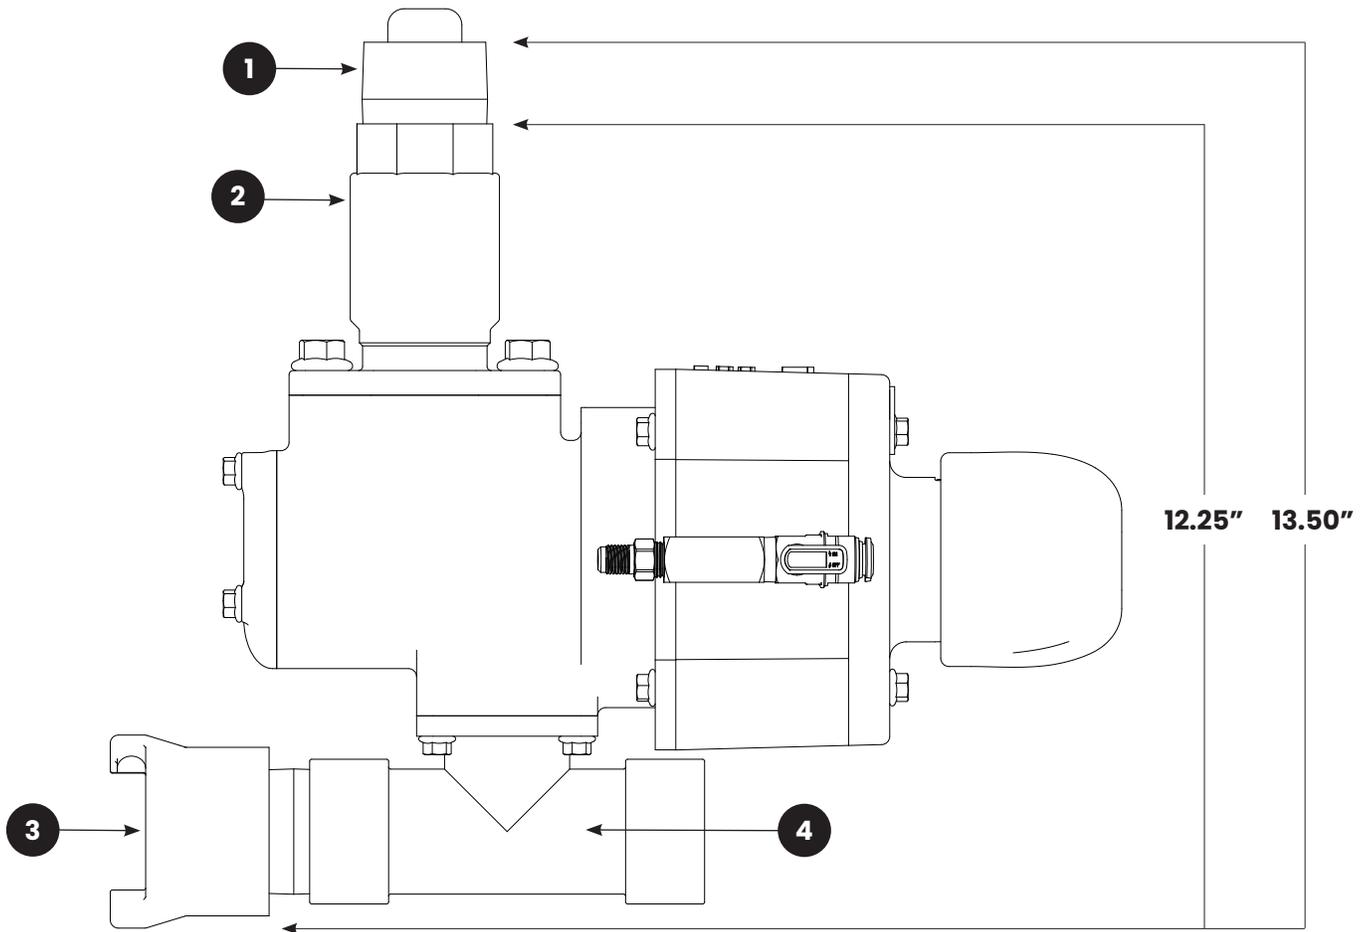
(1) 1.50" Installation Nipple; (2) Flanged Ball Valve; (3) Hose Coupling (REF) not included; (4) Outlet Tee
